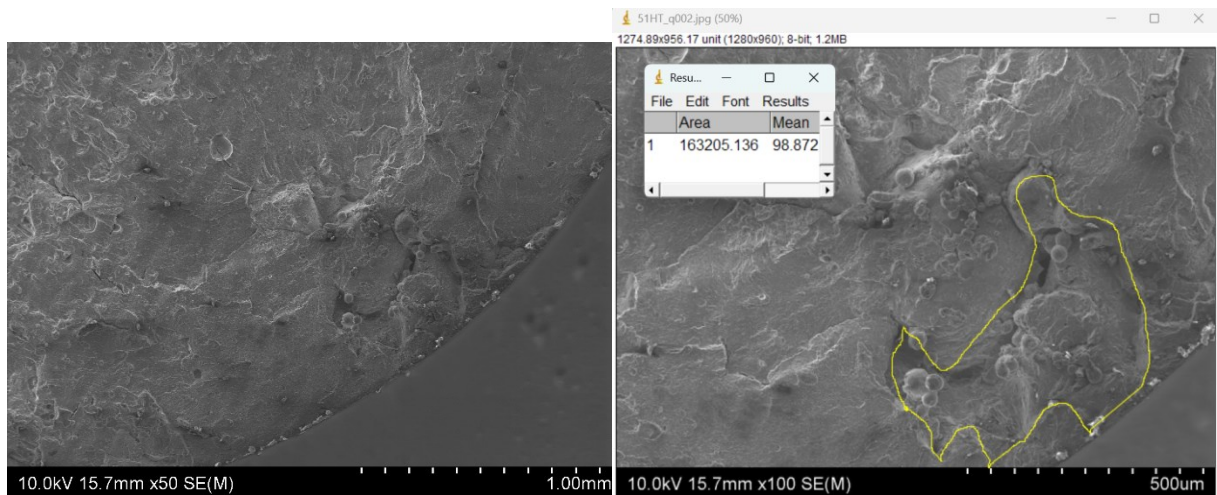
Fracture surface of sample CD_LBD-HT-3 a) x50, b) x100.
